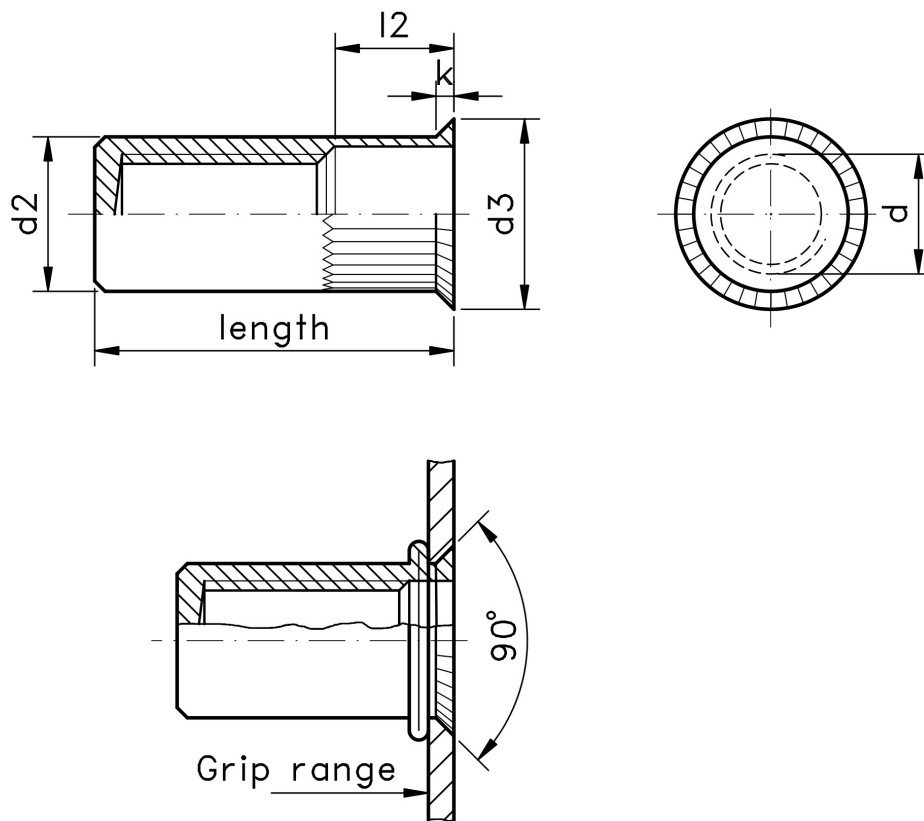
Rivet nuts with countersunk head, knurled shank and a closed end
